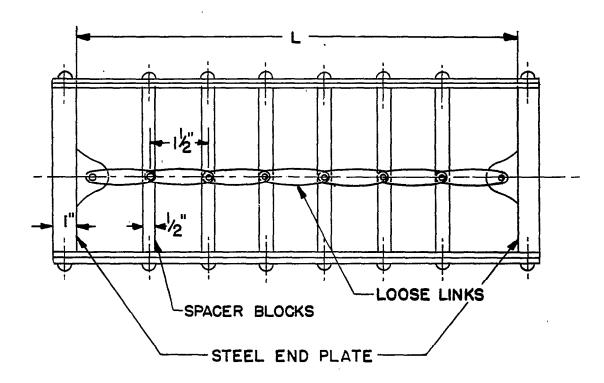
Longitudinal section of specimen showing spacer blocks.
